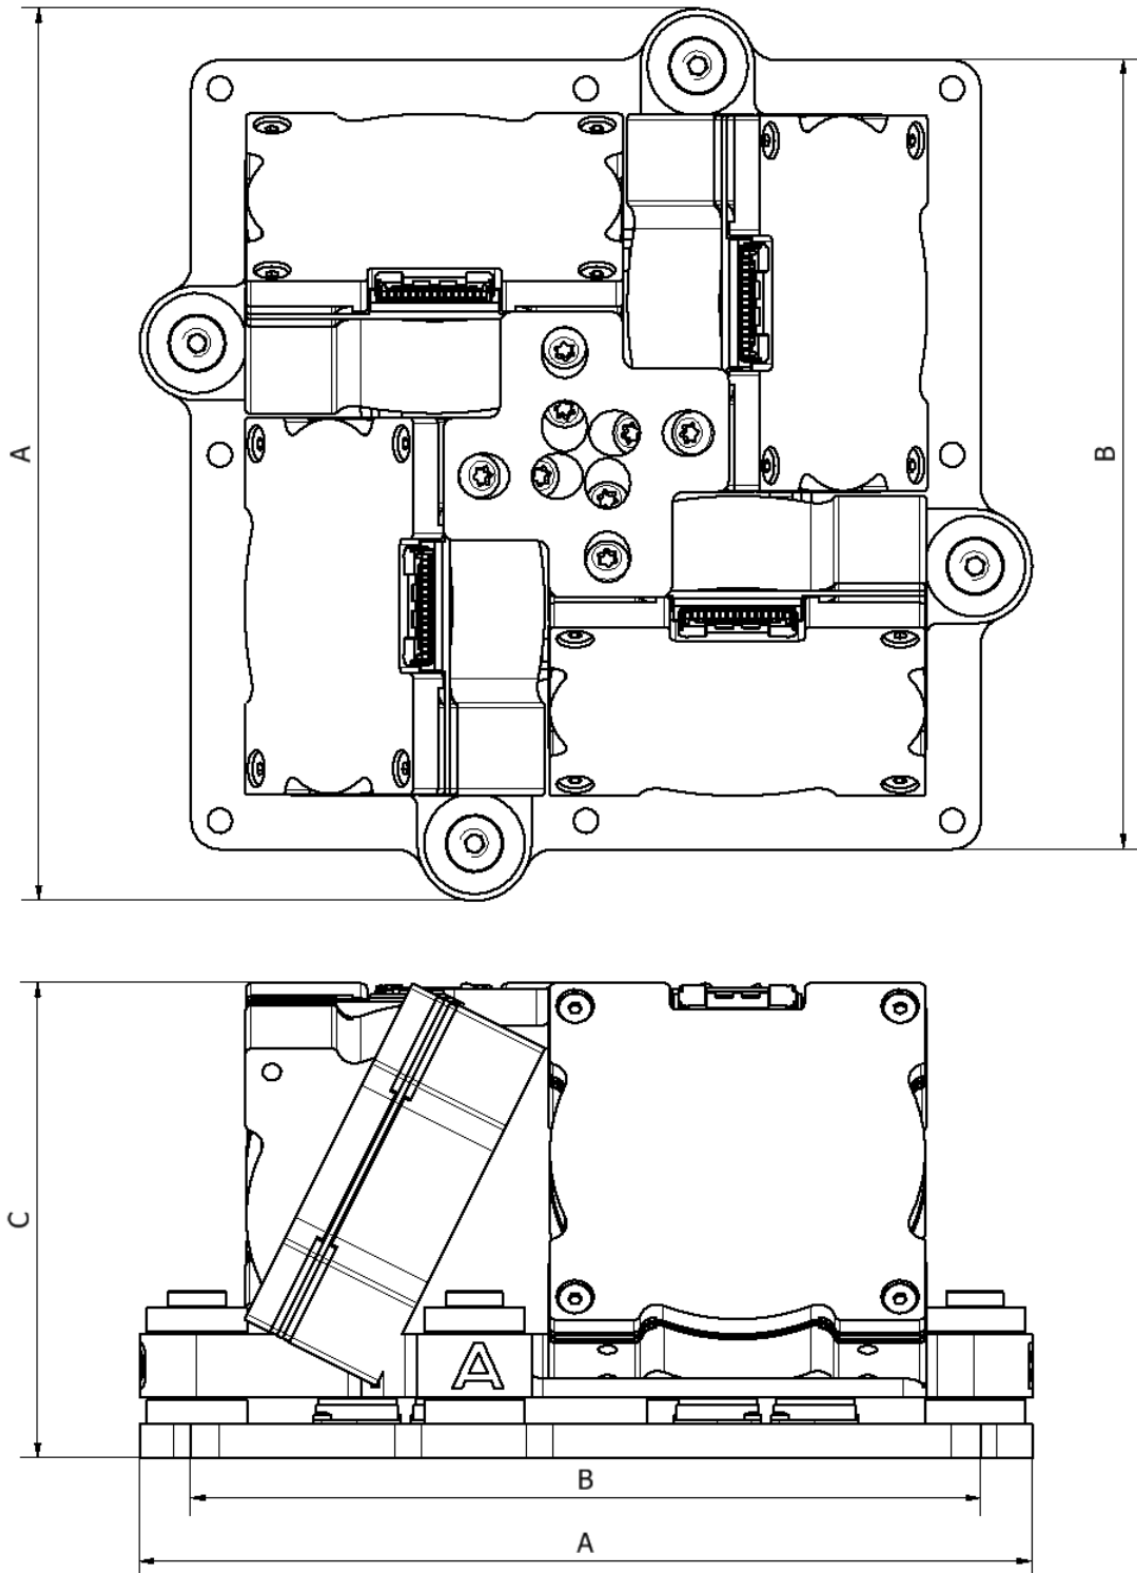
Indicative Dimensions of a CubeWheel Isolated Pyramid Assembly
